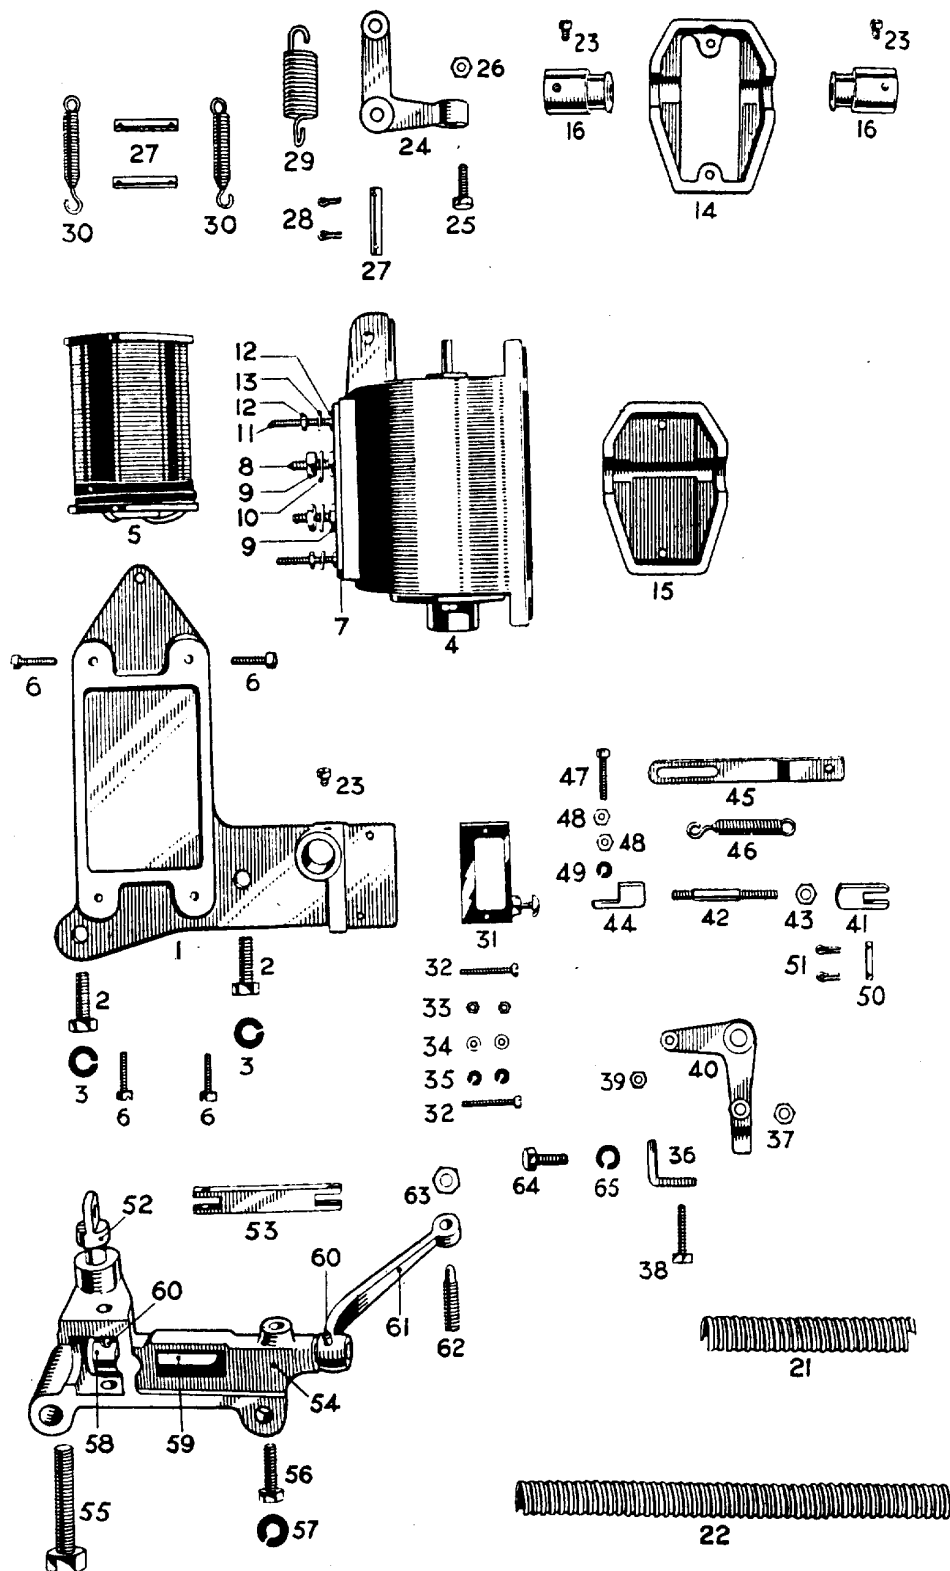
Fuel Cut-off and Exhaust Valve Lifter Mechanism.
